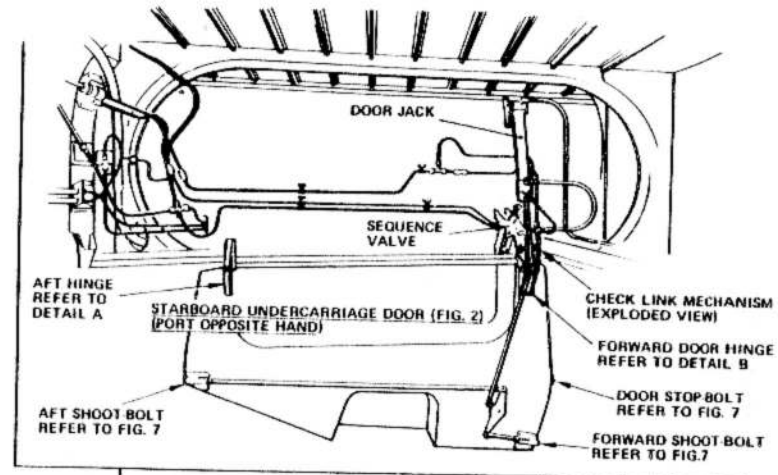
FIG. IIC. UNDERCARRIAGE - HOSE INSTALLATION
